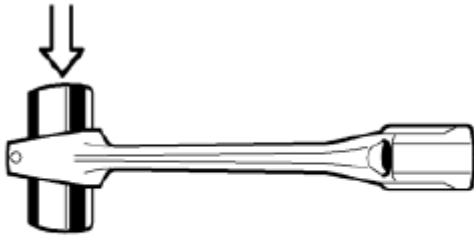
Removing Piston Circlip Using Special Tool (11 5 464)
